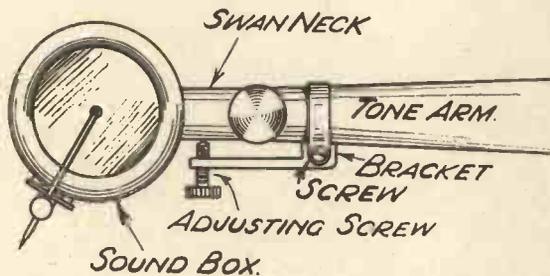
Details of the adjusting screw fitted to the tone arm.
